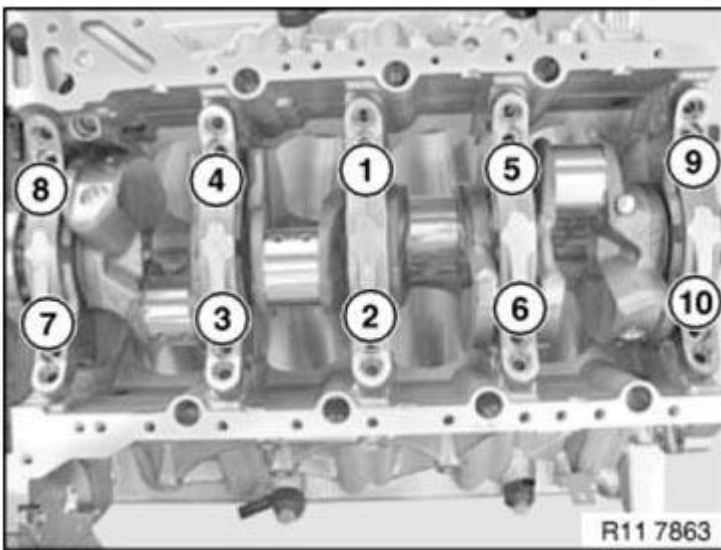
Identifying Main Bearing Caps Collar Bolts Tightening Sequence
